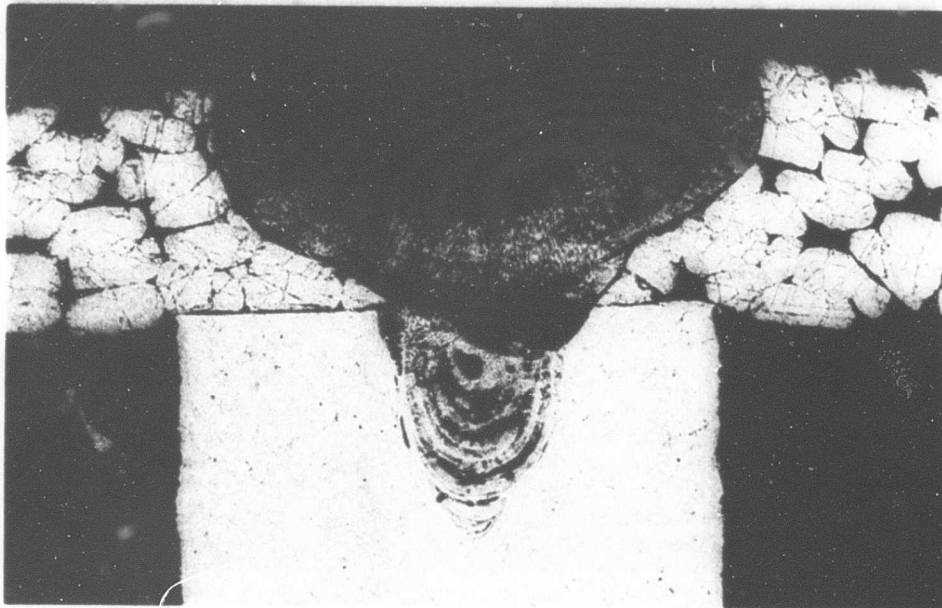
A Micrograph of a Butt Weld at the Blade Leading Edge. (The Skins Are Welded Together and to the Leading Edge Simultaneously.)
